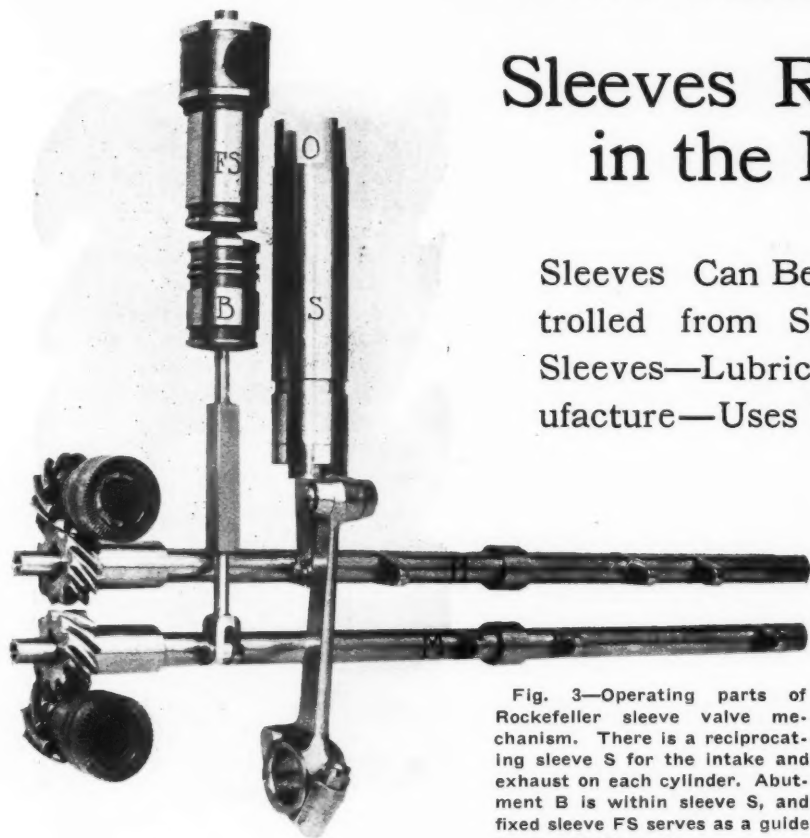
Operating parts of Rockefeller sleeve valve mechanism. There is a reciprocating sleeve S for the intake and exhaust on each cylinder. Abutment B is within sleeve S, and fixed sleeve FS serves as a guide for top of sleeve S
